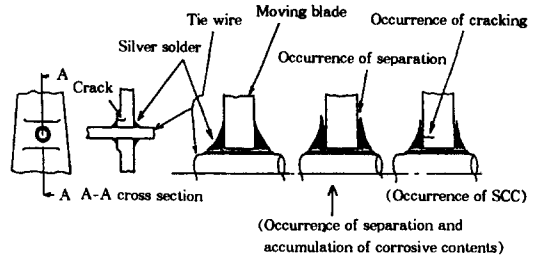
Stress corrosion cracking of last stage blade due to the separation of silver solder.
